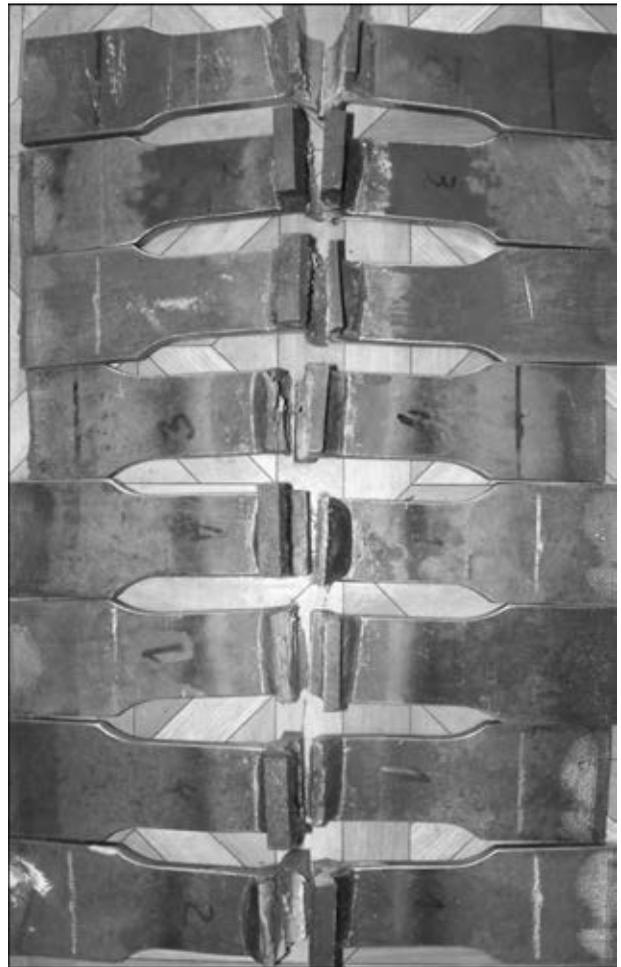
General view of welded T-joints with lack of root penetration which were strengthened by HFMP after fatigue tests
